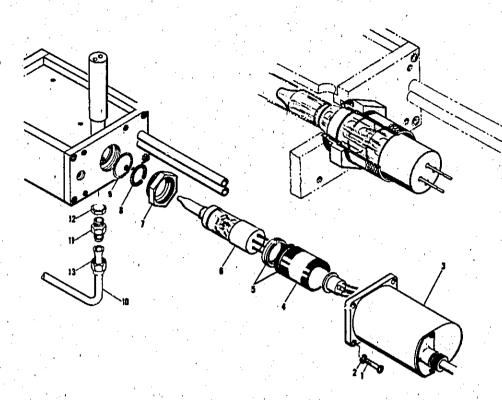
Exploded View of Klystron Mounting Parts (618C)
